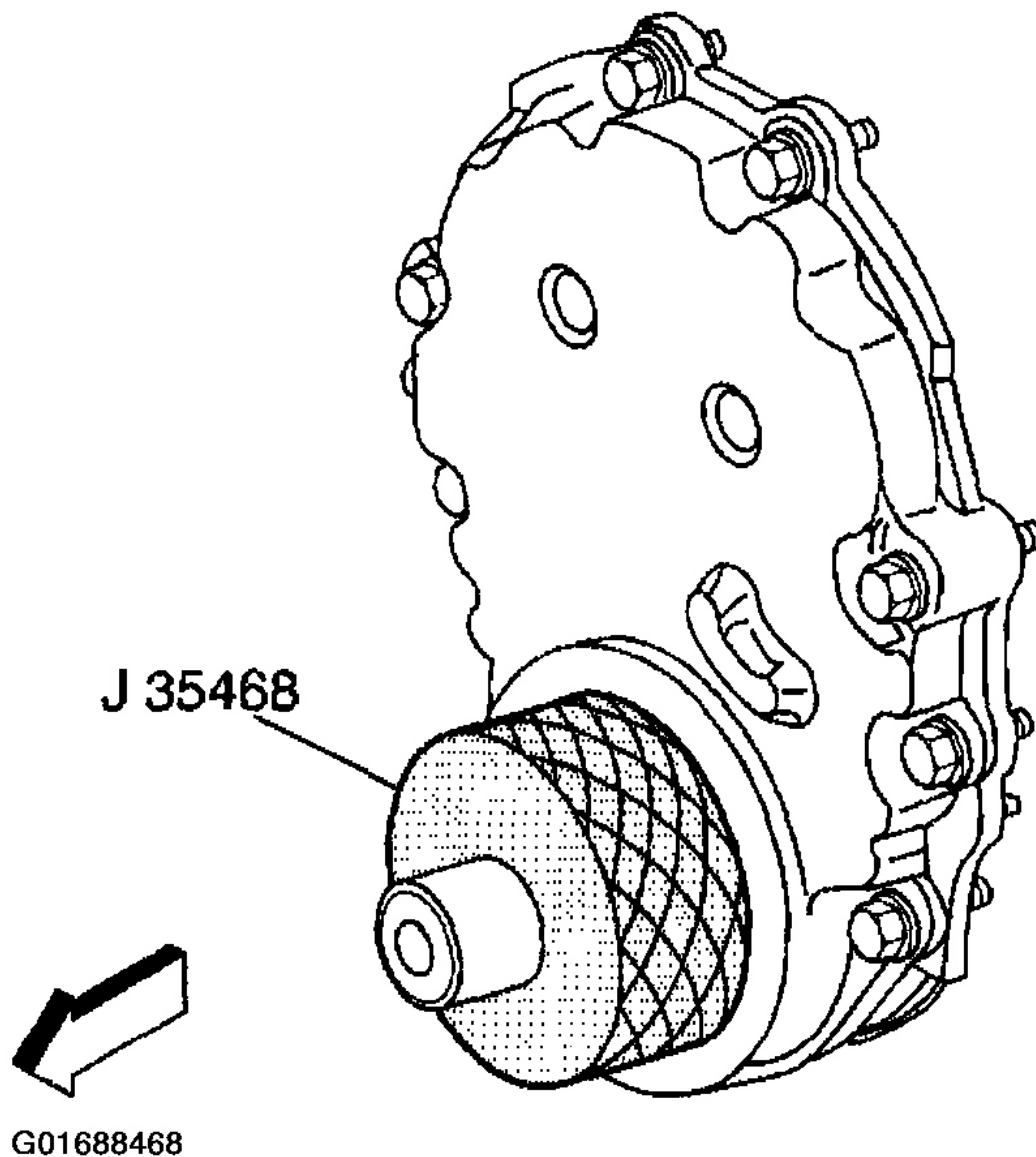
Installing Crankshaft Front Oil Seal Using J 35468
